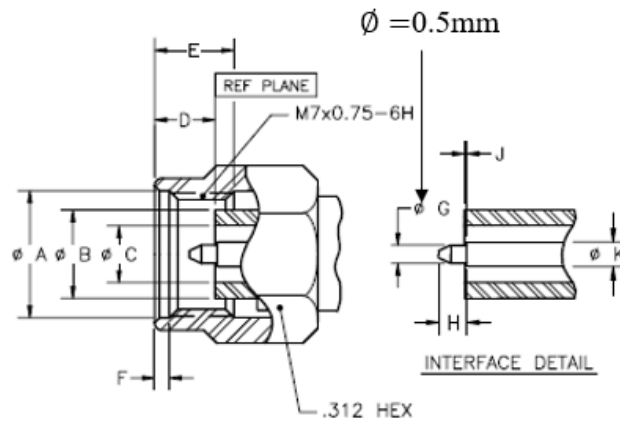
Mechanical drawing of a SMA connector [5.24]: Side view (Left), End view (Right)
